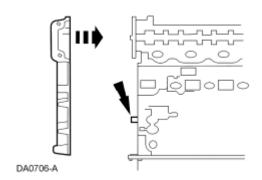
Locating Alignment Marks Courtesy of FORD MOTOR CO.
